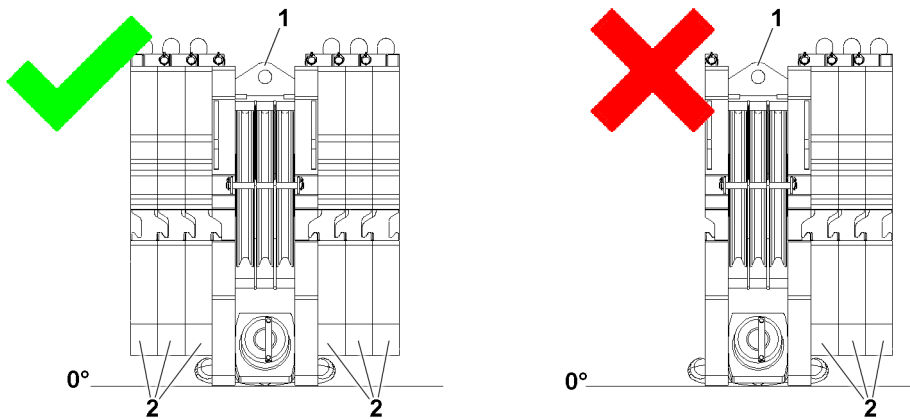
Asymmetric assembly or disassembly of the auxiliary weights
